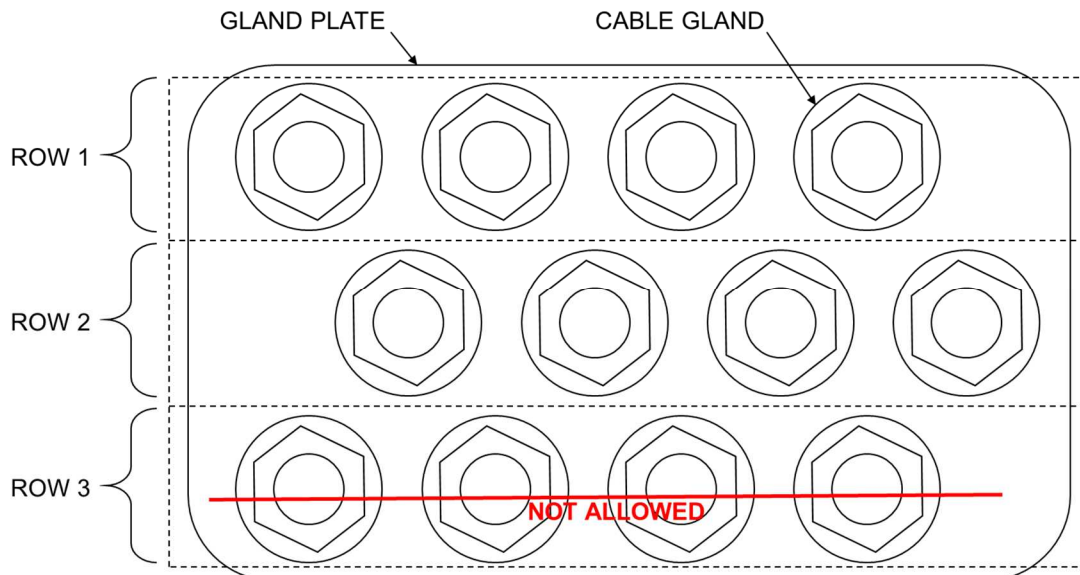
Cable gland arrangement on gland plate illustration. The arrangement presented (more than two rows) is not allowed.
